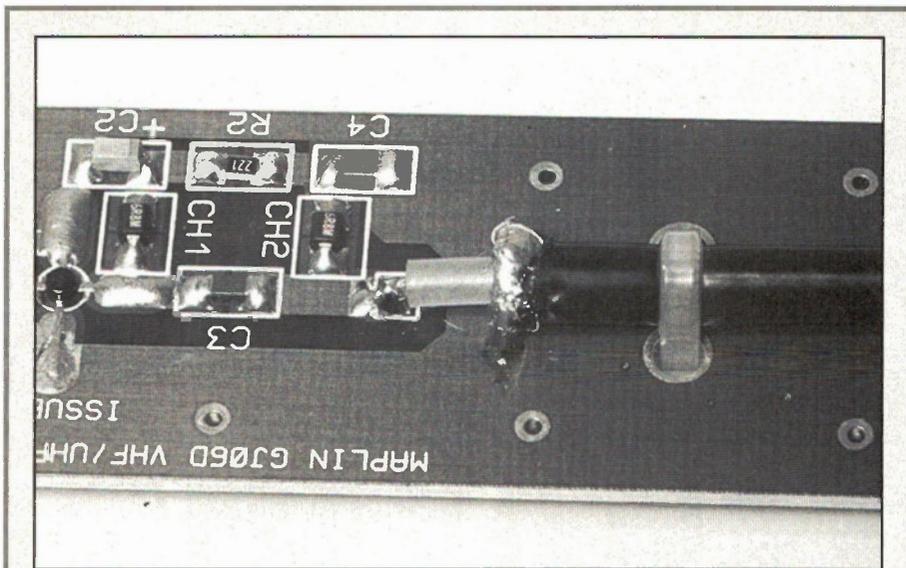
Close-up showing one of the cable ties holding the coax in position.
